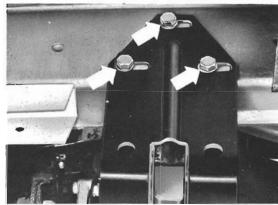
Two nuts that hold the front mount support or the transmission gearshift housing.
